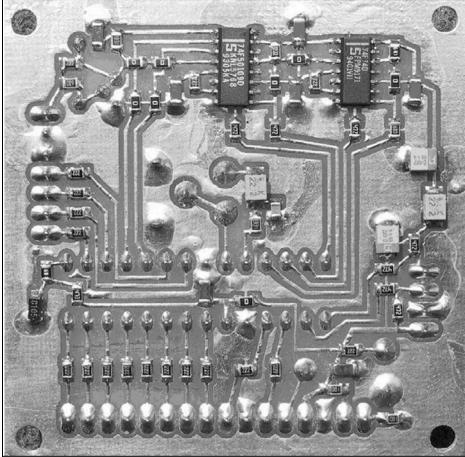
Picture of the track side of the counter PCB with SMD componets fitted, note the 0R links.
